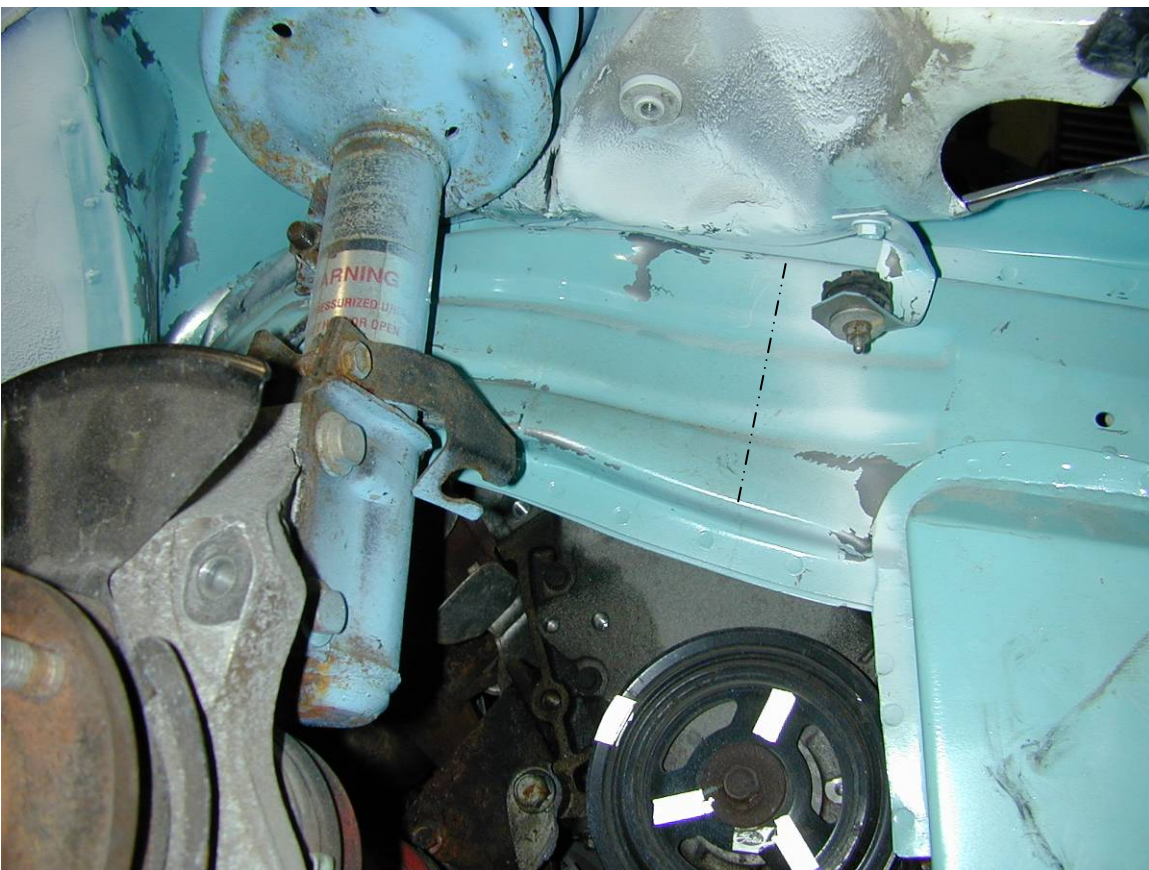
Right-hand rail aft of laser-welded blank joints.
